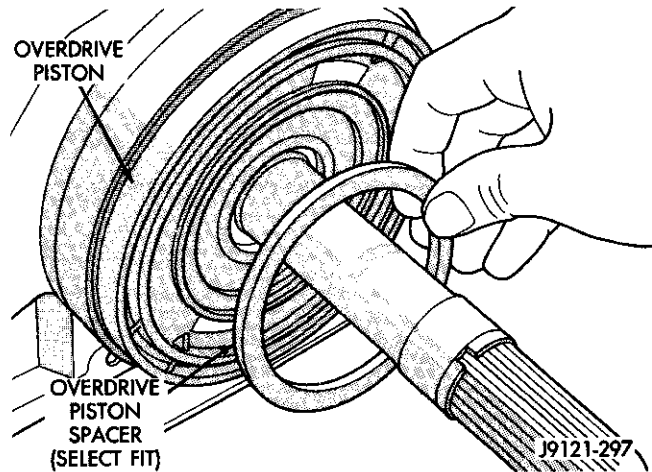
Overdrive Piston Thrust Plate Removal/Installation
